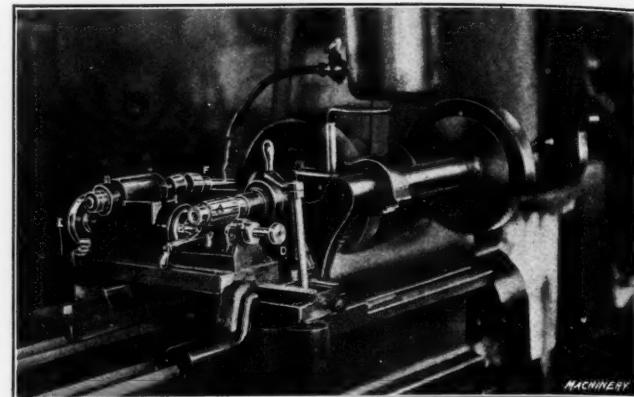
Hobbing Attachment for Lathe, on which Eccentric Pinions are hobbed
